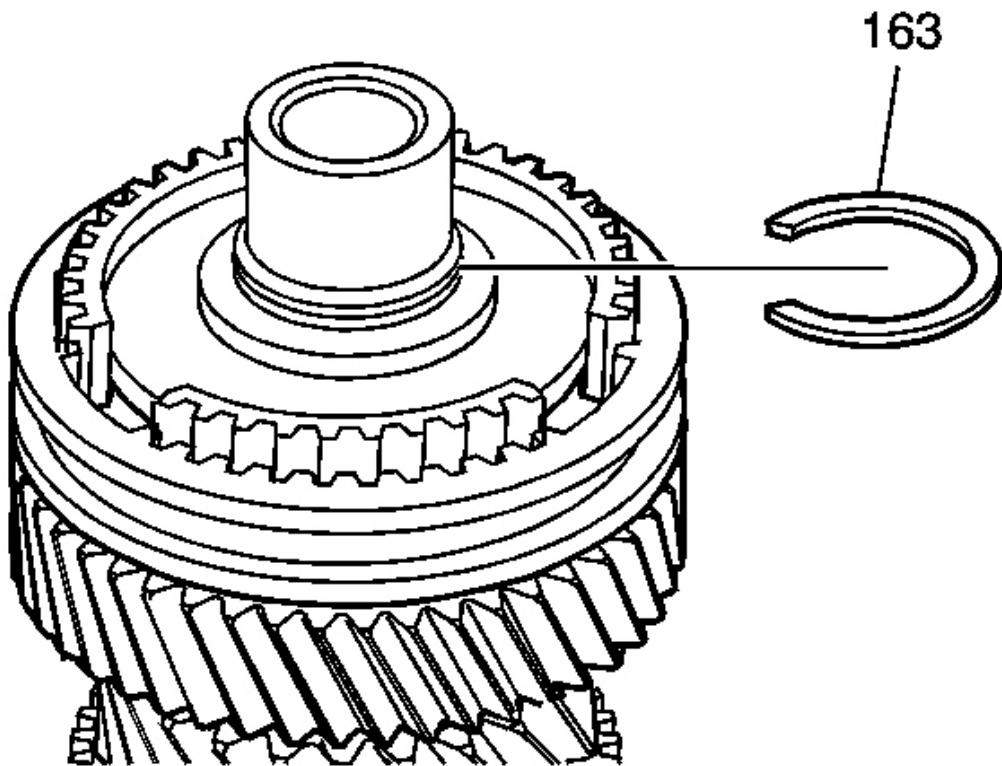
View Of 5th/6th Gear Synchronizer Hub Snap Ring
